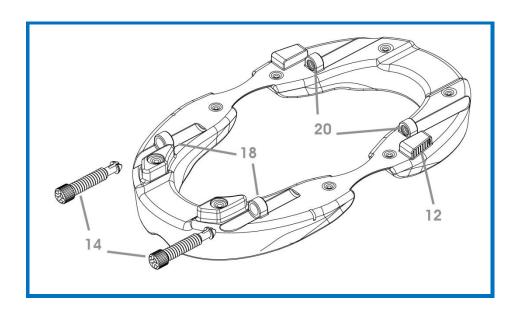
User Adjustments (Folding, Threaded Lugs, Screws, & Adjustment Markings)
